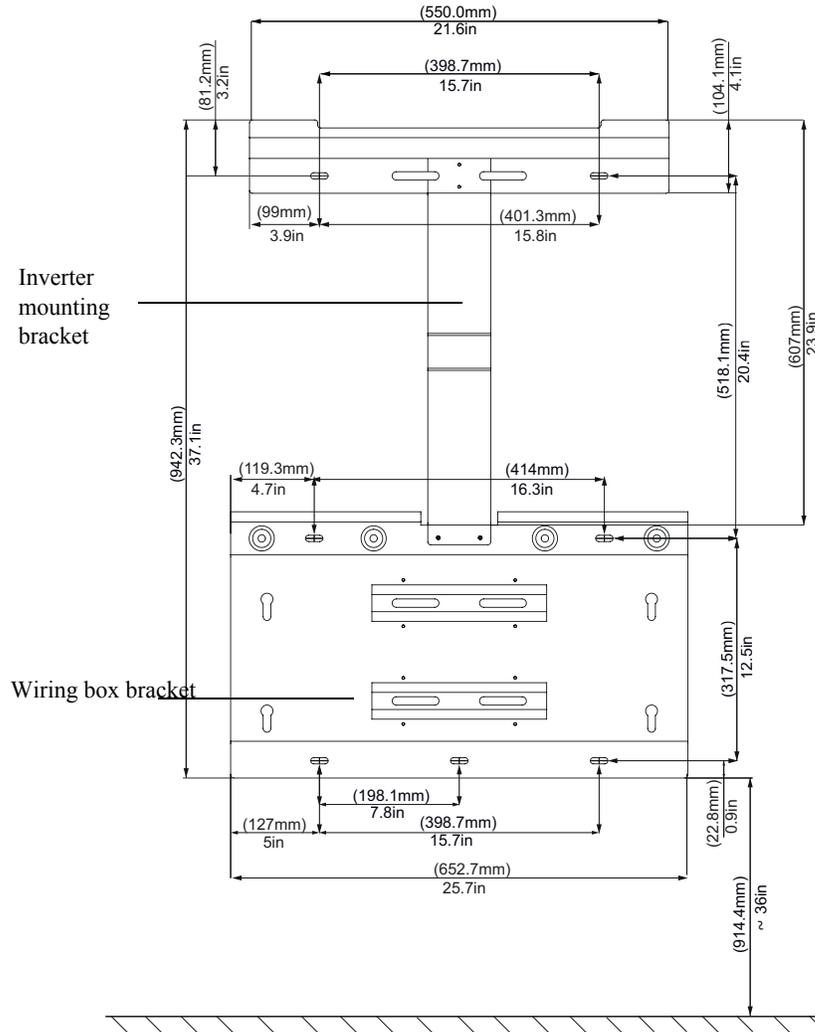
Mounting bracket dimensions- Wiring box and Inverter
